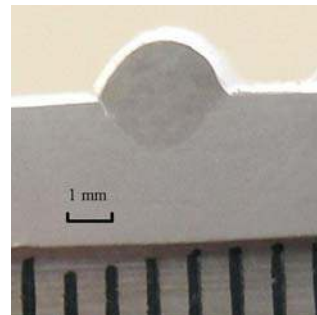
, Weld bead and cross section view of DB-GMAW (Bypass current L&R : 40A-40A)
